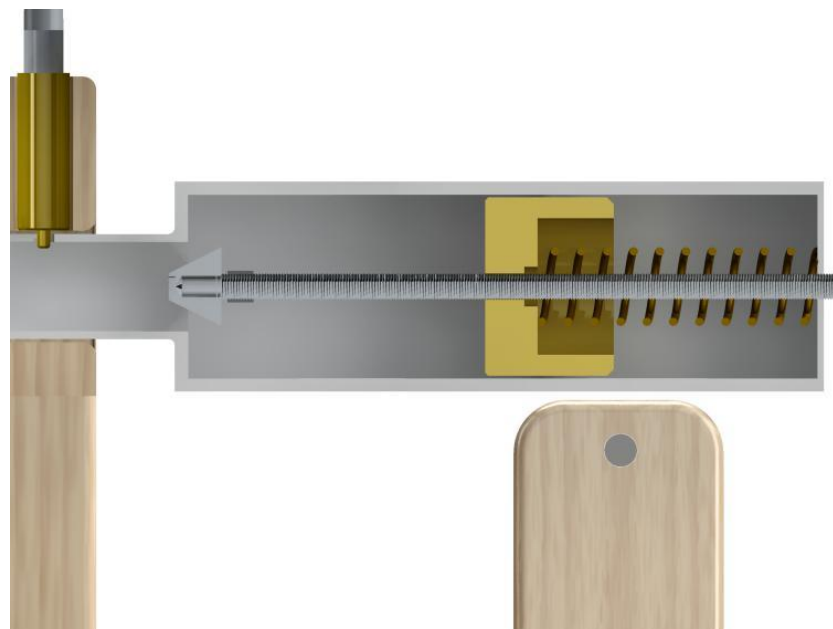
Close-up on PAO internal mechanism, ESM compressing the main spring
